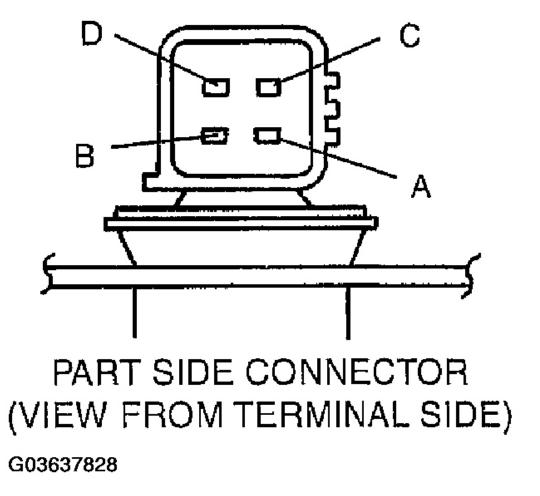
Inspecting Continuity Between FP Connector Terminals Courtesy of MAZDA MOTORS CORP.
